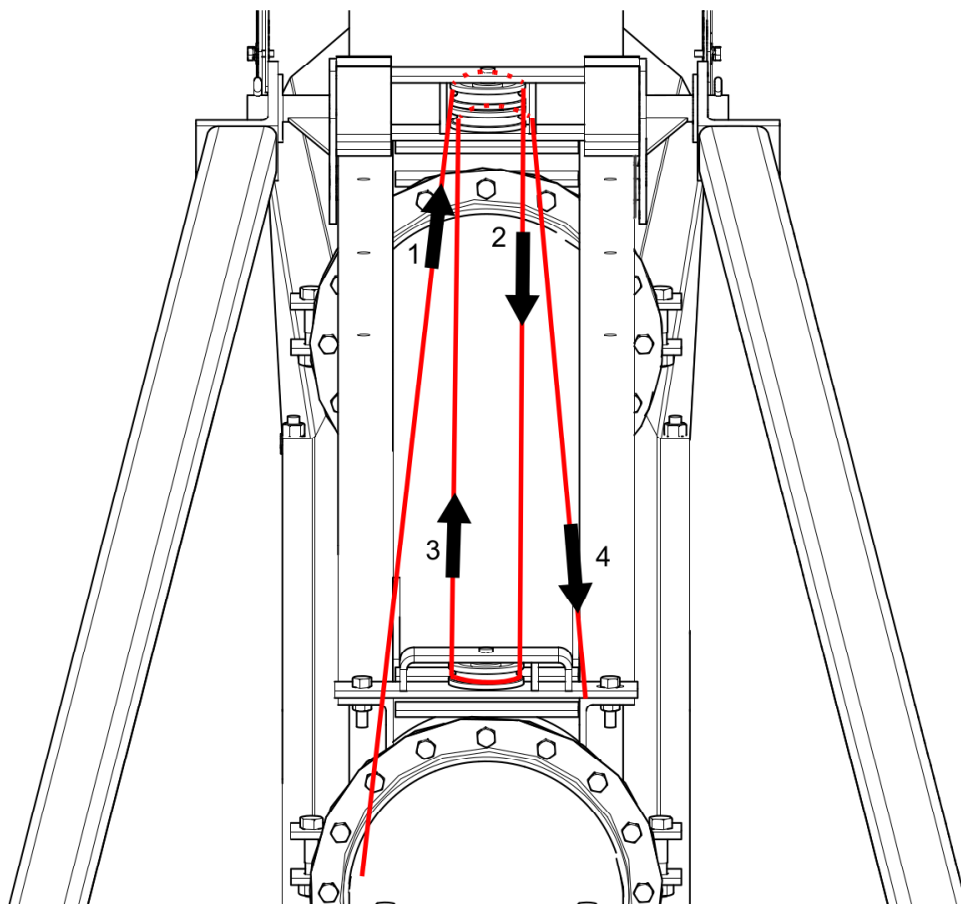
Routing Cable through Motor Mount Pipe (if equipped with Hand Winch)
